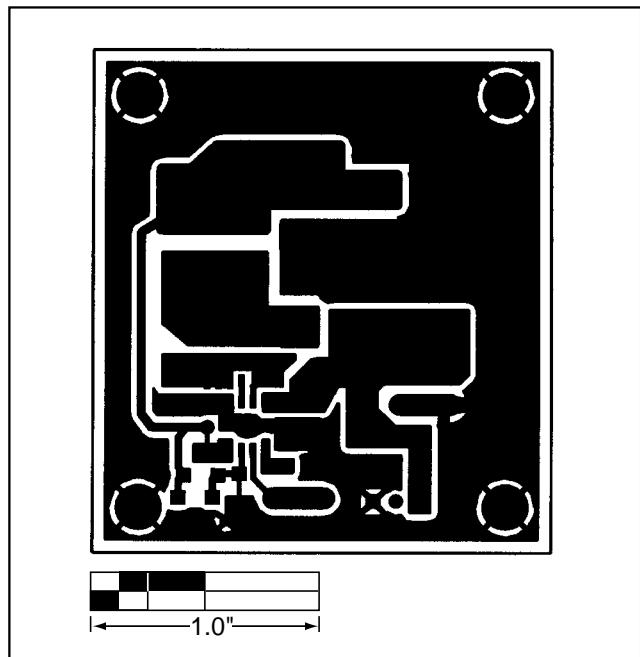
MAX1649 EV Kit PC Board Layout—Component Side
